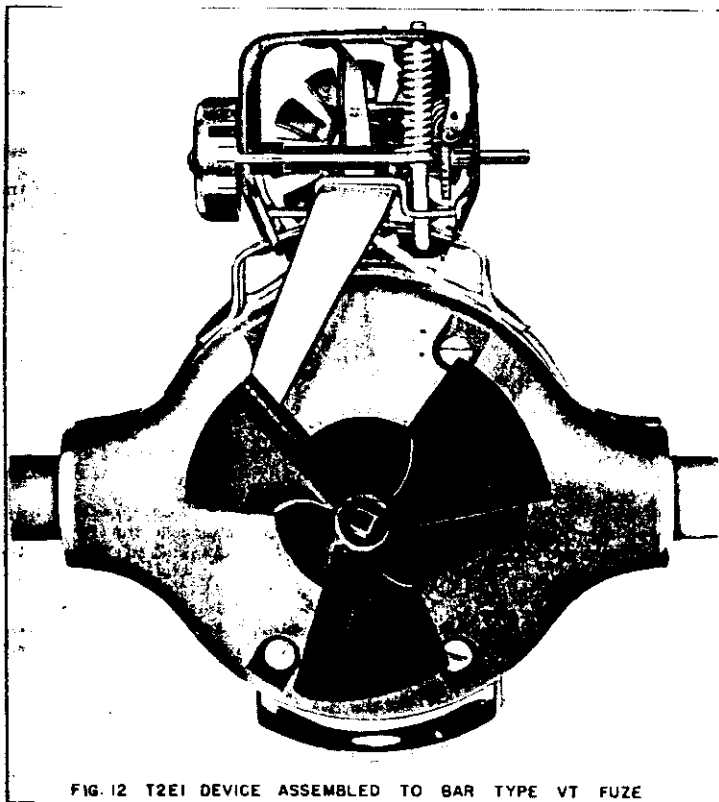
T2E1 DEVICE ASSEMBLED TO BAR TYPE VT FUZE
